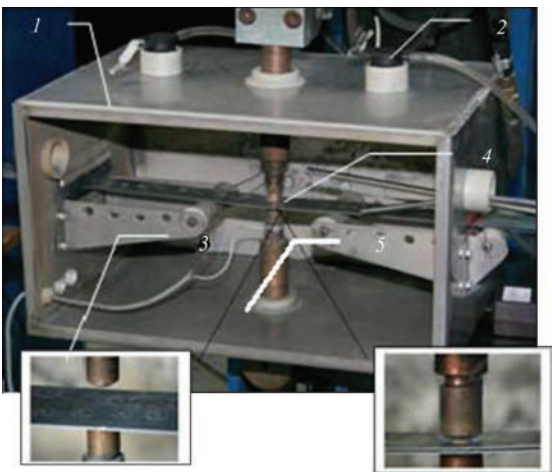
Research station for the examination of fume and gas generation during resistance welding: 1 — fume chamber of 0.03375 m<sup>3</sup>; 2 — welded workpiece; 3 — machine of ZPa-130i type; 4 — inverter controller HWS 2102IQ; 5 — aspirators; 6 — fume filter; 7 — gas analyser Testo-33/Testo-350; 8 — system for measuring and monitoring welding parameters
